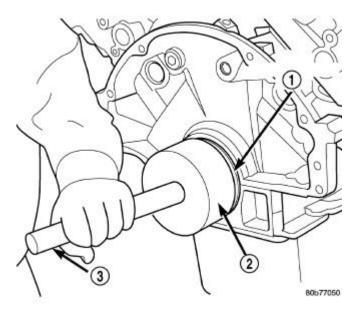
Crankshaft Rear Oil Seal Installation Courtesy of CHRYSLER LLC
